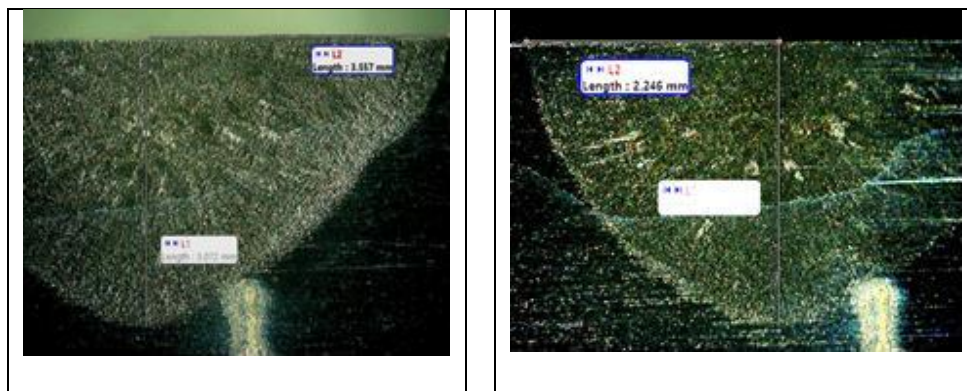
View of weld bead of Serial No. 23 (a) 1st pass and (b) 2nd Pass done on two sides
